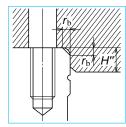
Shoulder for the Fig. 10 Shoulder for the ball slide datum face
